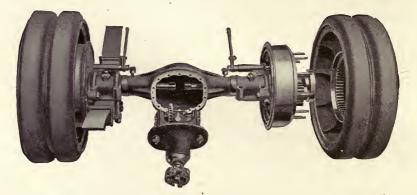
New Type of Double Reduction and Internal Gear Drive Axle used on White 3 and 4 Ton Trucks.
